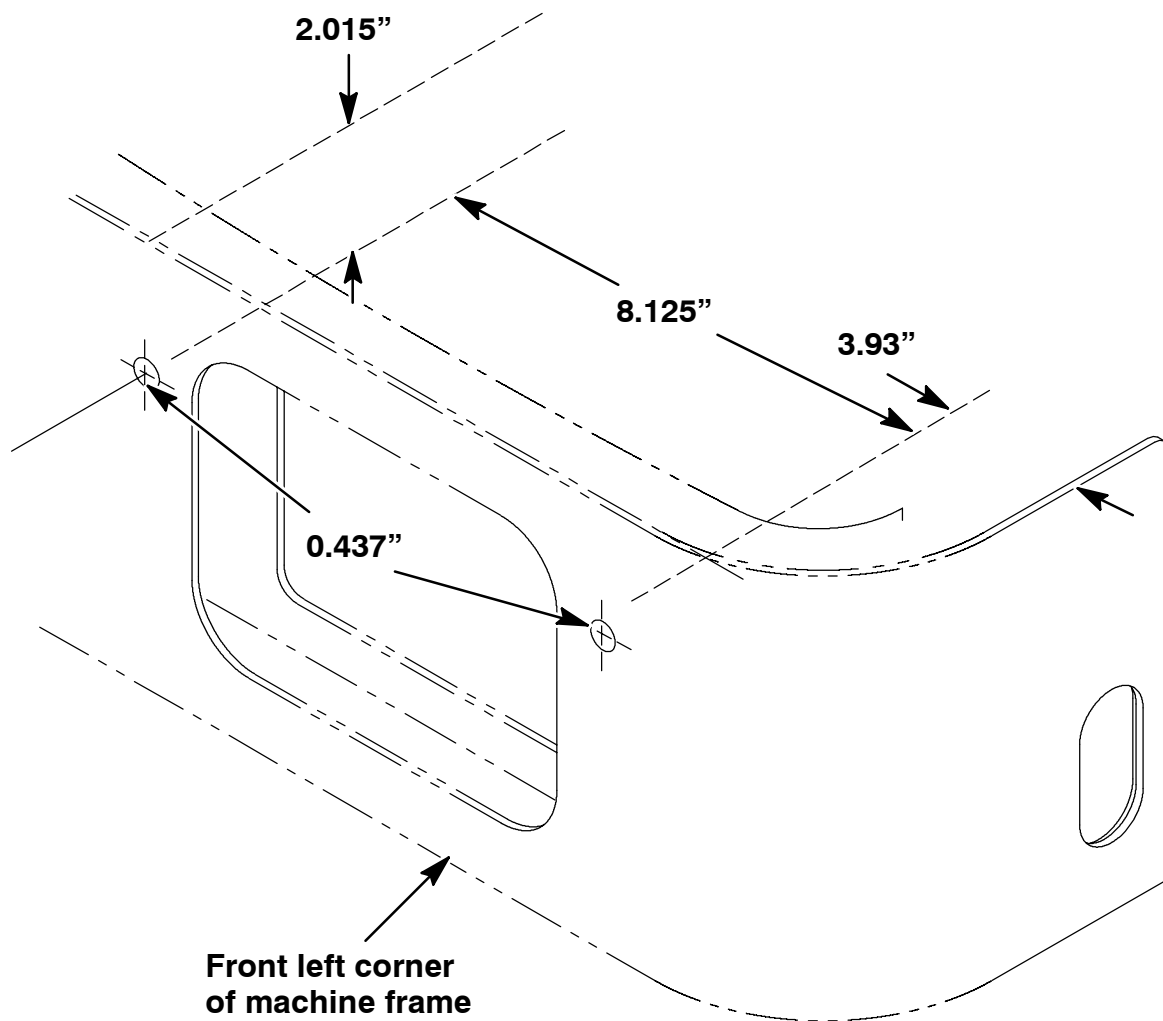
Power Wand Tray Mounting Hole Dimensions
